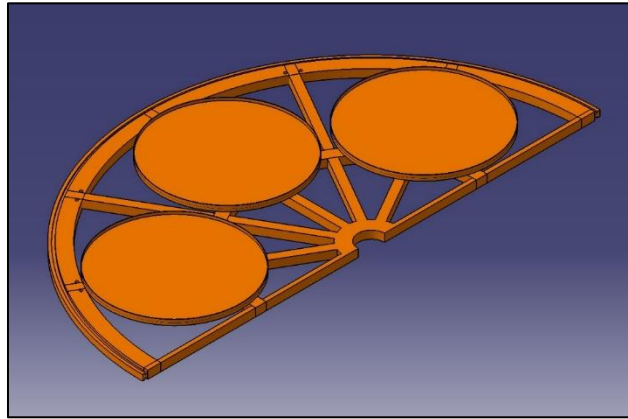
Isometric View of Circular Fixture for RS-25 Engines
